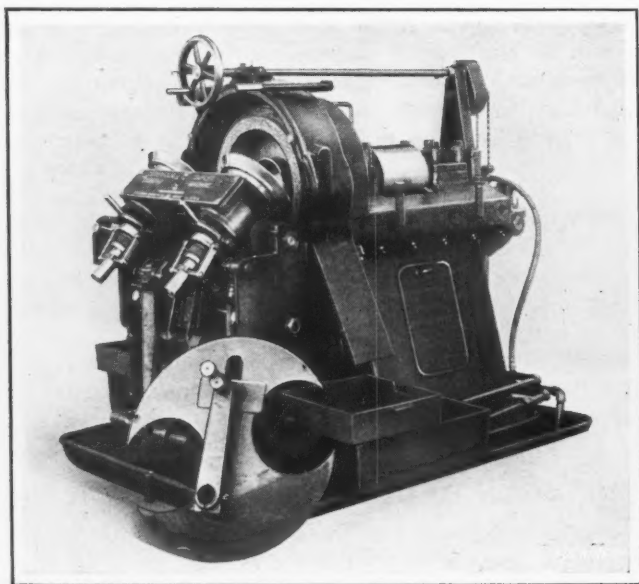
Osterholm Duplex Rotary Surface Grinding Machine
